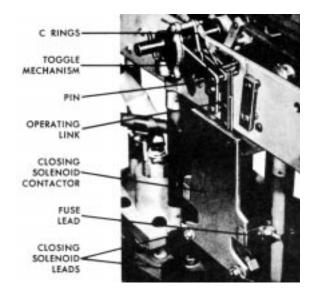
Releasing contact operating rod of closing solenoid contactor from toggle mechanism.
